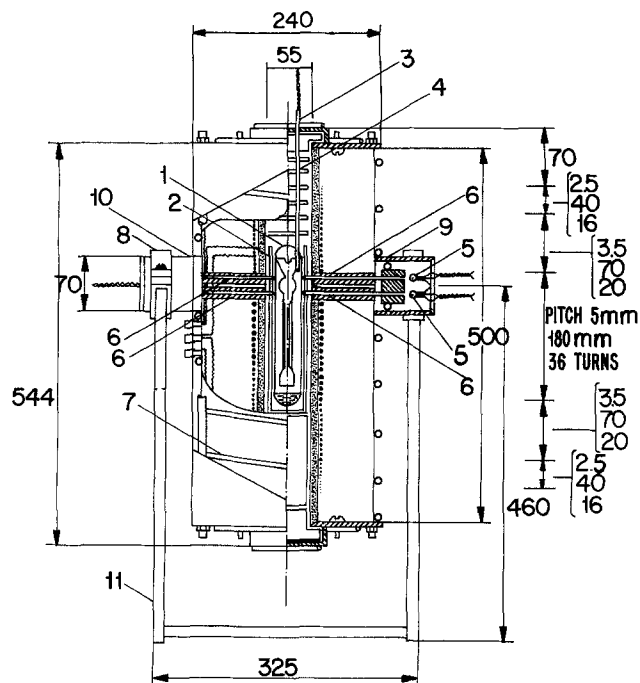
Furnace for viscosity measurements (dimensions in mm). 1, Viscometer; 2, silver tube; 3, thermocouple; 4, radiation shielding; 5, timing lamps; 6, quartz rod light guides; 7, water-filled cooling system; 8, support bearing; 9, lamp housing; 10, housing for photodiodes and detector electronics; 11, furnace stand.
